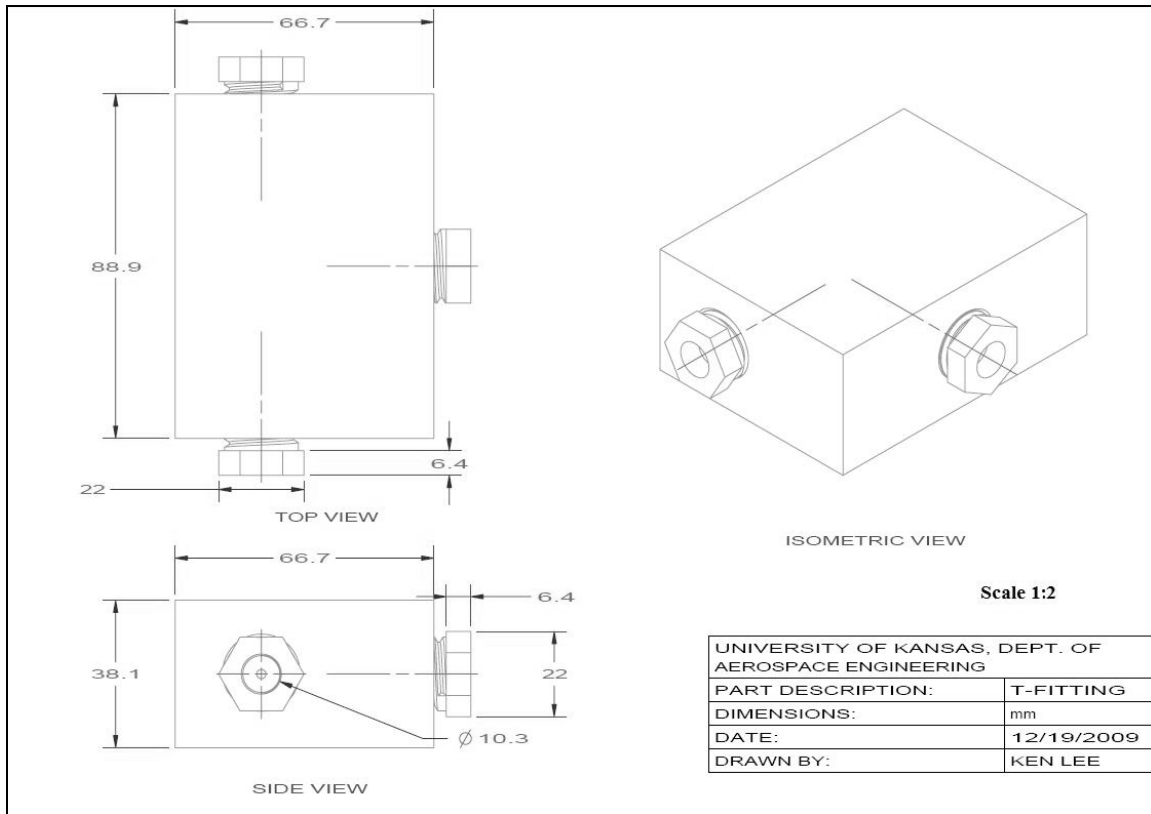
Side, Top and Isometric CAD Views of the T-Fitting Drafted in UG NX 6.0.
